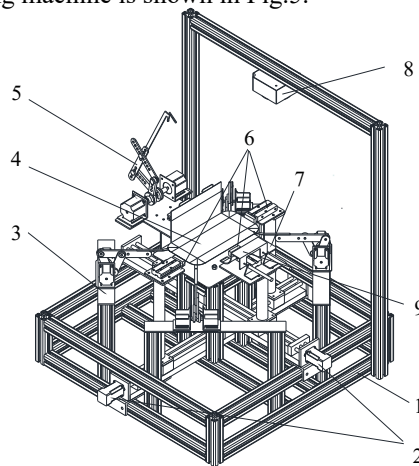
Three-dimensional model of egg tart carton packing machine. (1. base support device, 2. adjustment device, 3. flaps folding device, 4. carton, 5. cover panel folding device-5R mechanism, 6. four side panels folding device, 7. cover panel folding device, 8. control system, 9. tongue guide device)
